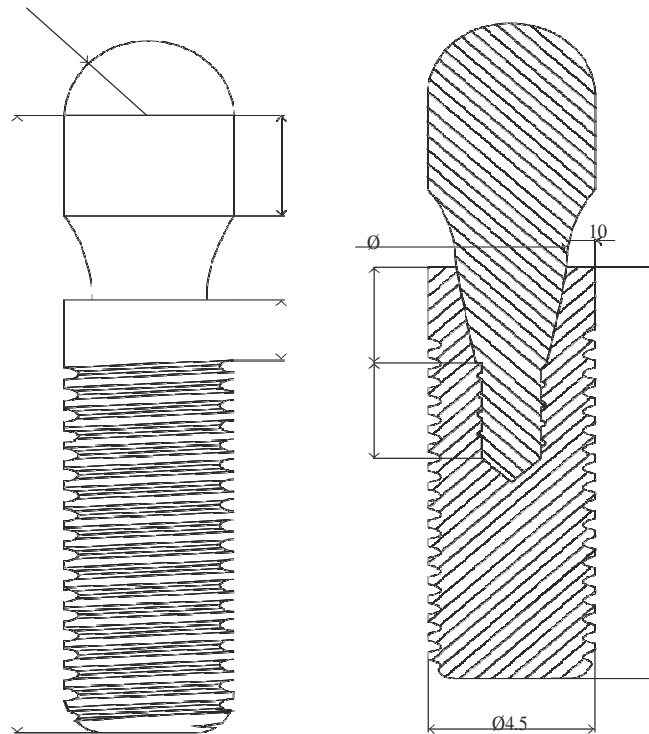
Side and sectional views and main dimensions of the implant and abutment assembly.
